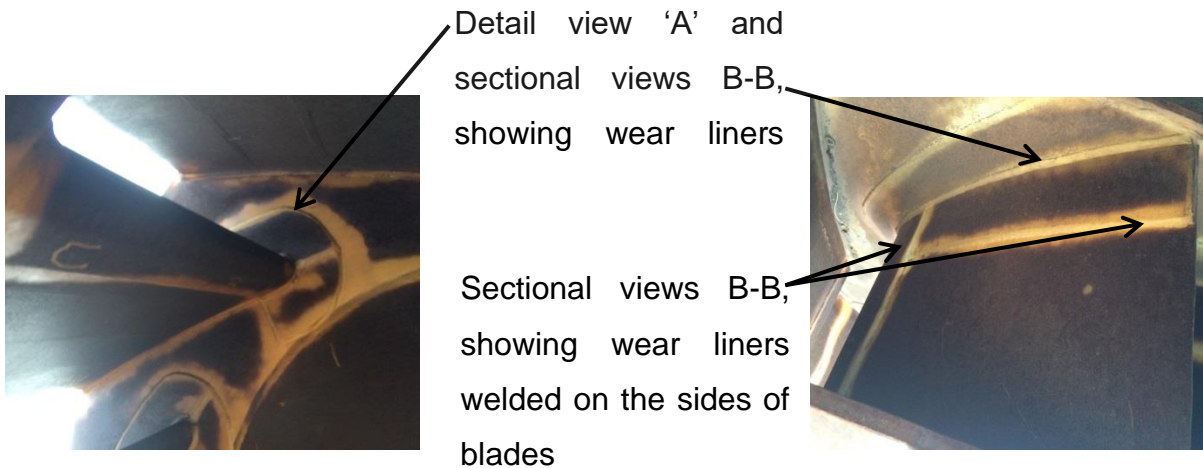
5: Centrifugal impeller showing the inside through sectional B-B.
